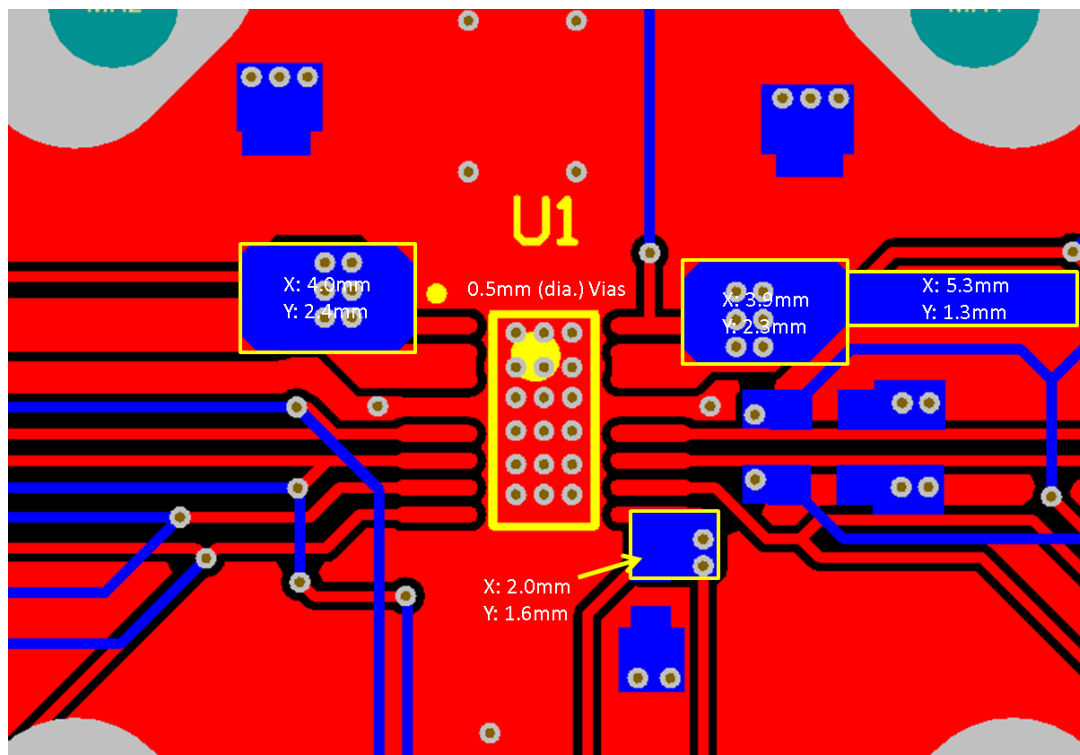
Thermally Optimized PCB Layout Bottom Layer
